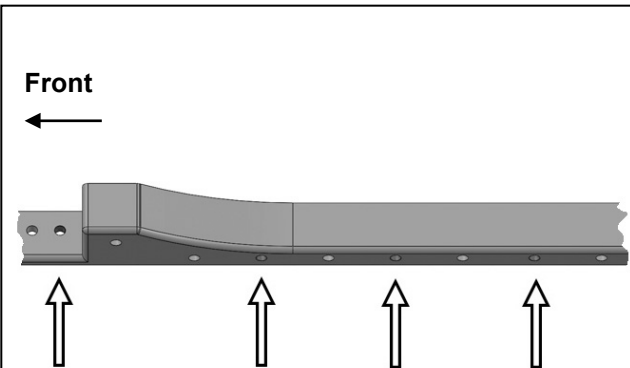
Mark and drill hole through pinch weld. Attach top of Driver/left front Support Bracket to back of pinch weld. Reinstall Running Board
